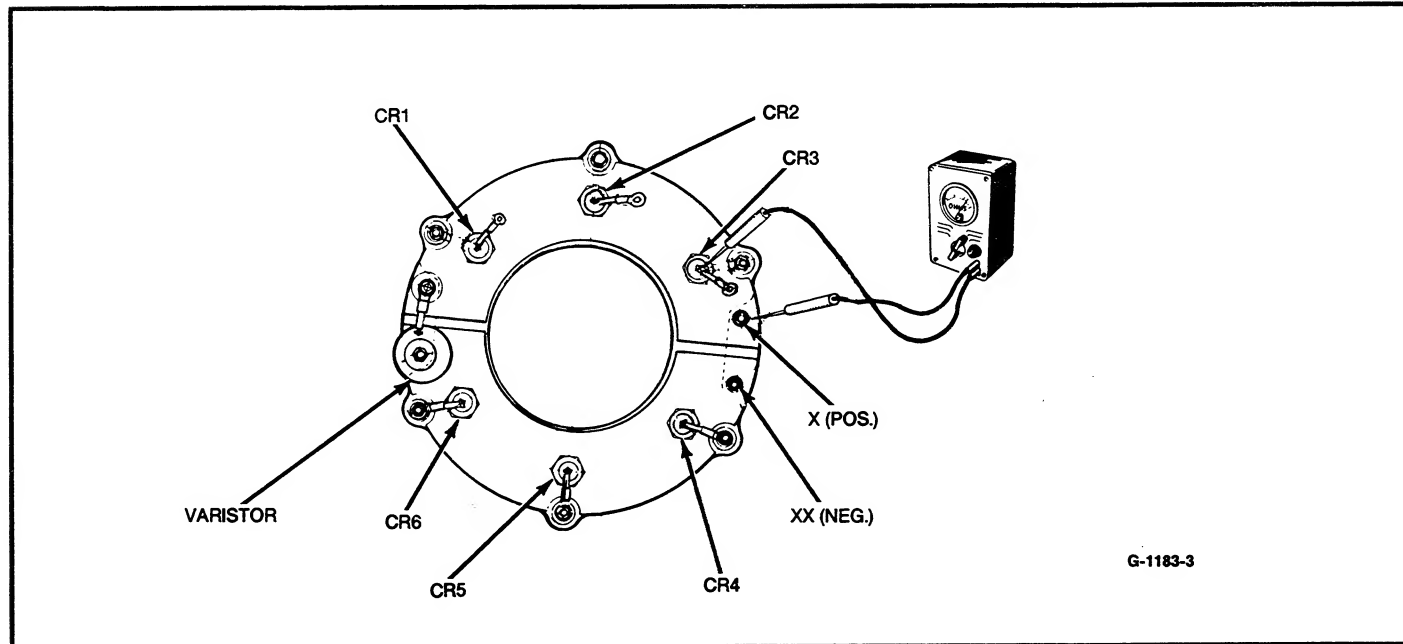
TESTING ROTATING RECTIFIER ASSEMBLY
